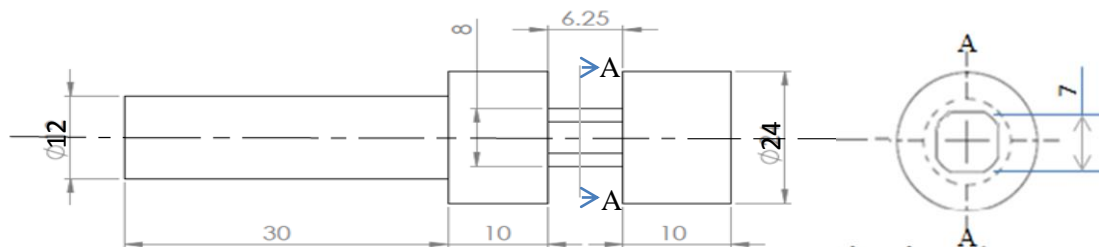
Drawing of used BFSW-Tool (all dimensions in mm)
